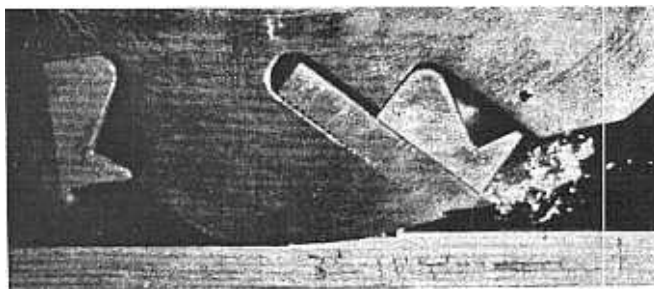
Test How. 8-knife, 8.70-inch cutting-circle cutterhead with knives extended 0.152 inch from gib face taking a 3/32-inch deep cut at a feed speed of 300 FPM.
